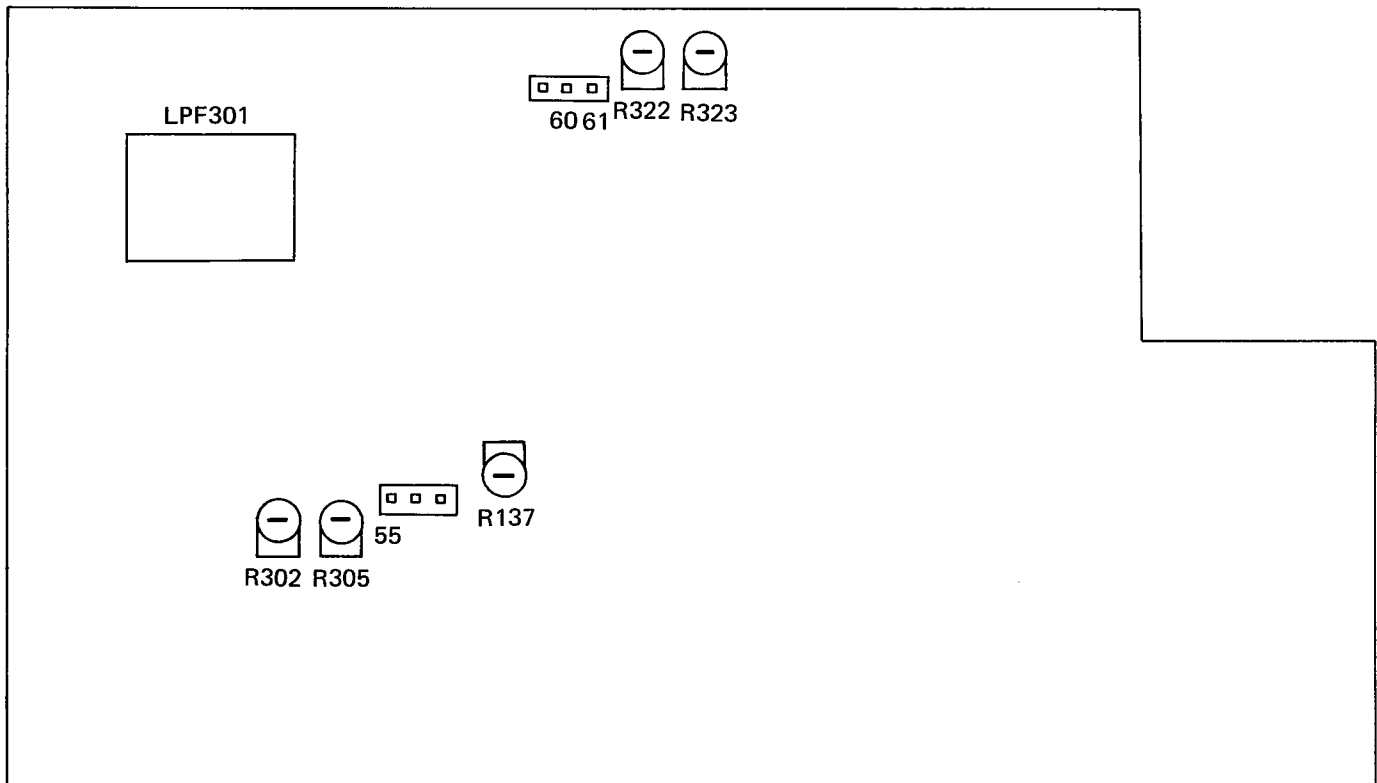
MPX/REGULATOR CIRCUIT BOARD (TOP VIEW)
